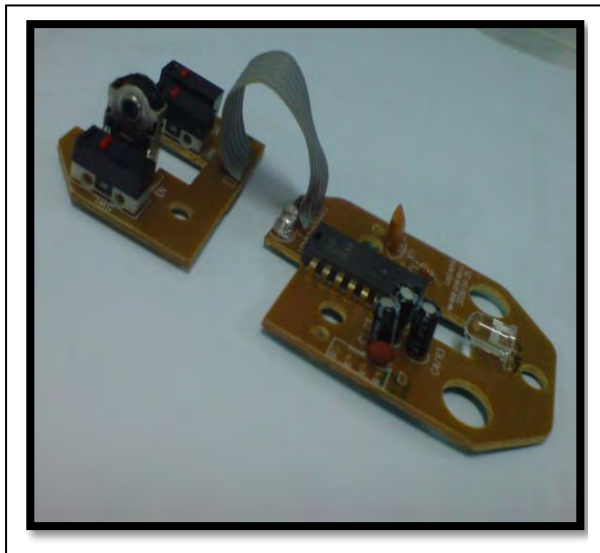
Printed circuit board (PCB) of optical Mouse
